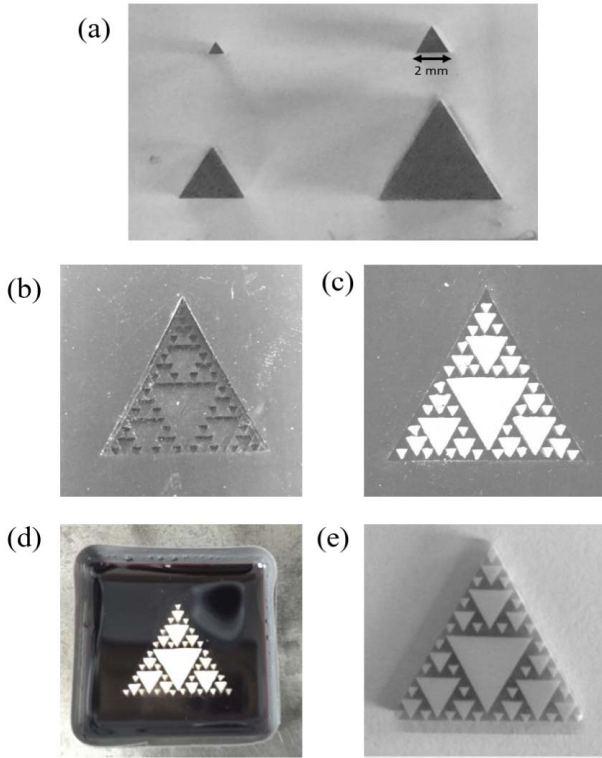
SG fractal composite fabrication process (a) individual cut ceramic pillars with different sizes, (b) 3-D printed mold, (c) ceramic pillars are placed in the mold, (d) mold is filled with polymer, and (e) surplus mold is machined OFF.
